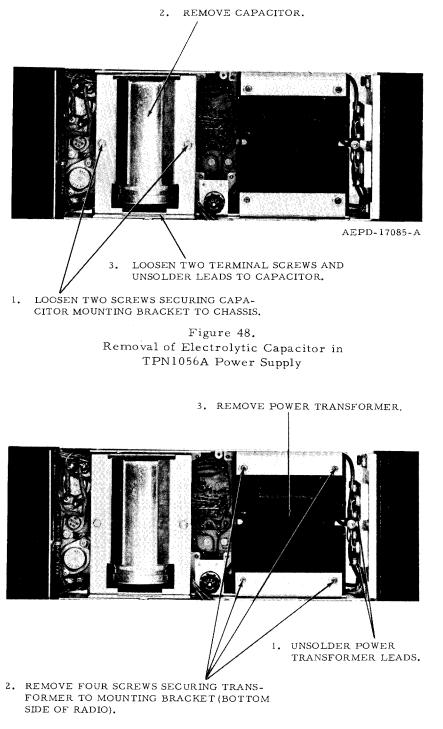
Removal of Power Transformer in TPN1056A Power Supply
